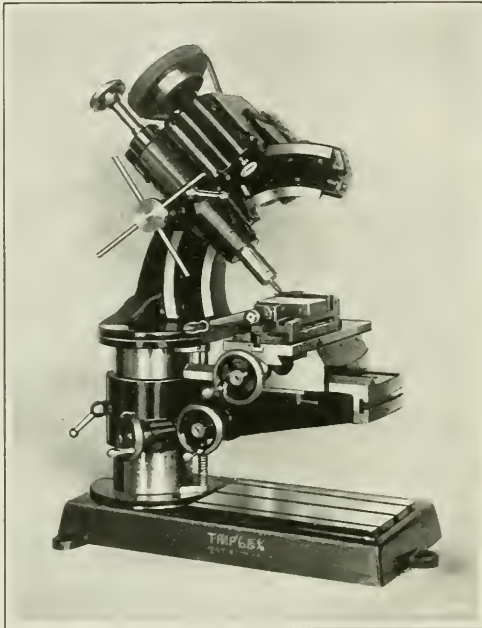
Performing an End-milling Operation with the Spindle in an Angular Position
